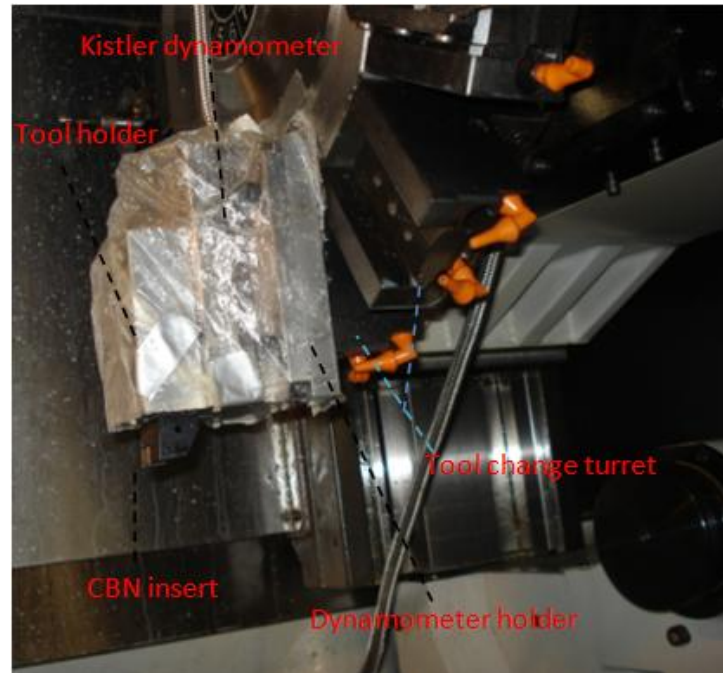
Dynamometer assembly via special fixture to the tool holder
